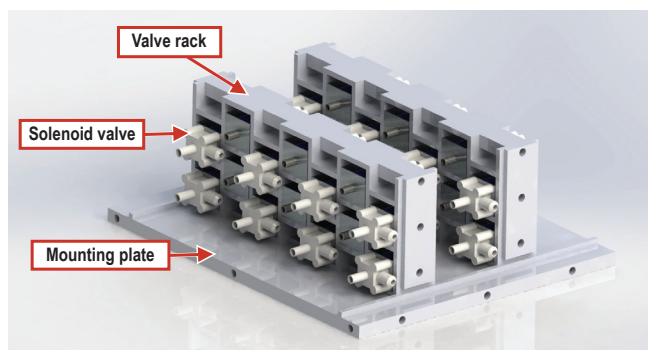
Layout of the solenoid valve assembly, housed inside the control unit.
